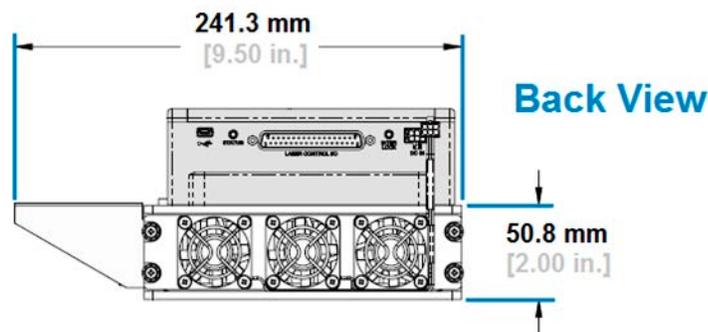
Dimensions – Fan-Cooled Heat Sink, Back View
